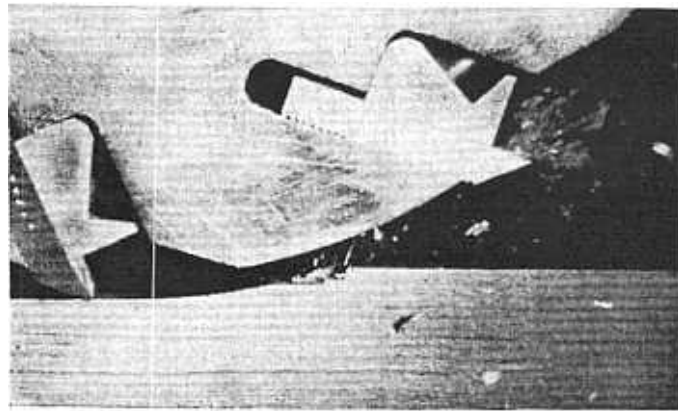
Test Ivy. 8-knife, 9.08-inch cutting-circle cutterhead with knives jointed to a heel width of 0.007 inch taking a 1/4-inch deep cut at a feed speed of 206 FPM.
